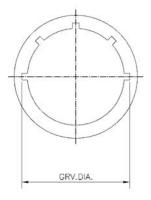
Cross section drawing of a self-lubricating elastomer polymer bearing
